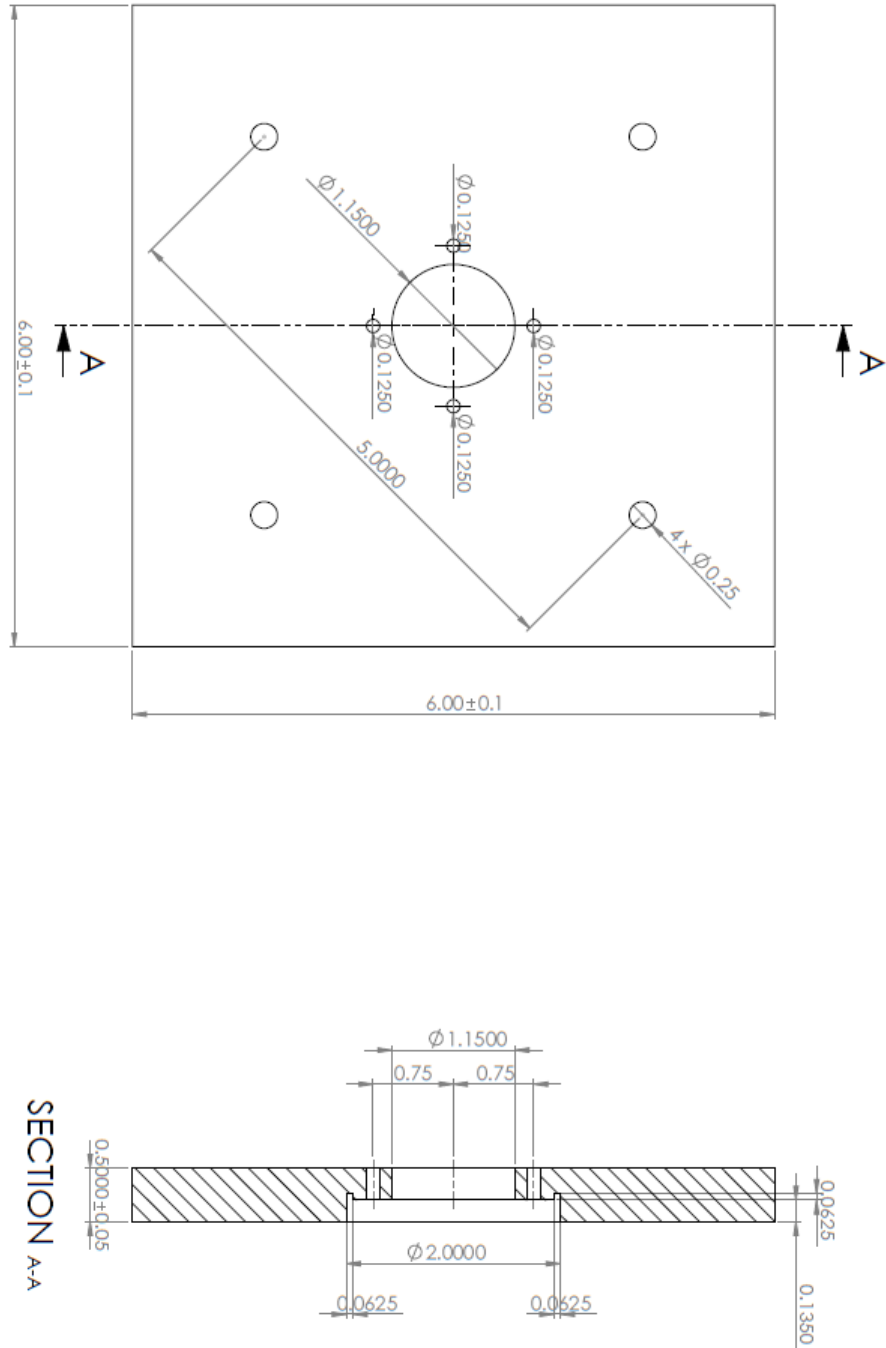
Engineering drawings of the top block of the Taylor-Couette cell. All dimensions are shown in inches.
